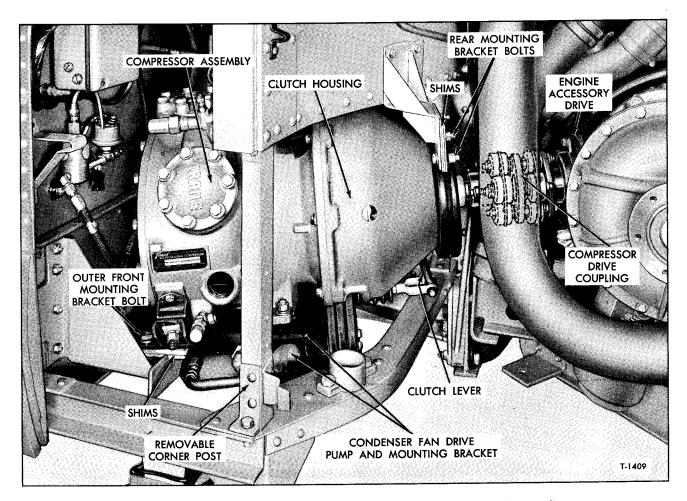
Refrigerant Compressor and Clutch Assembly Installed (Radiator Removed)
